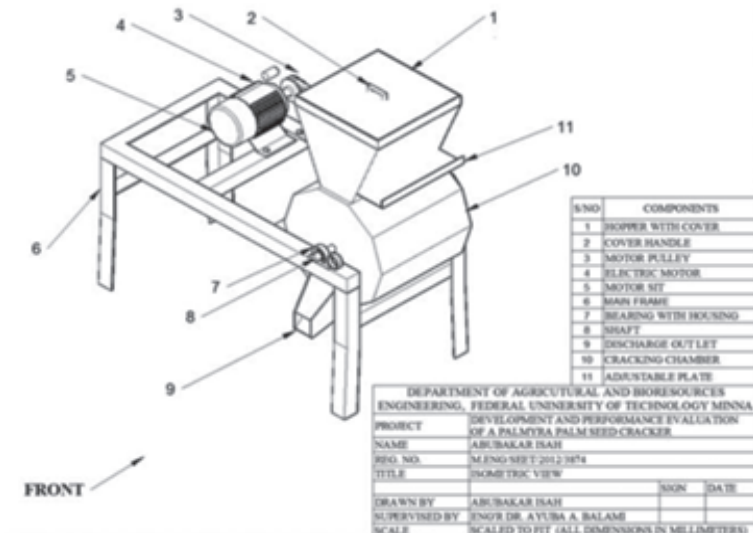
Developed Palmyra Palm Seed Cracking Machine
